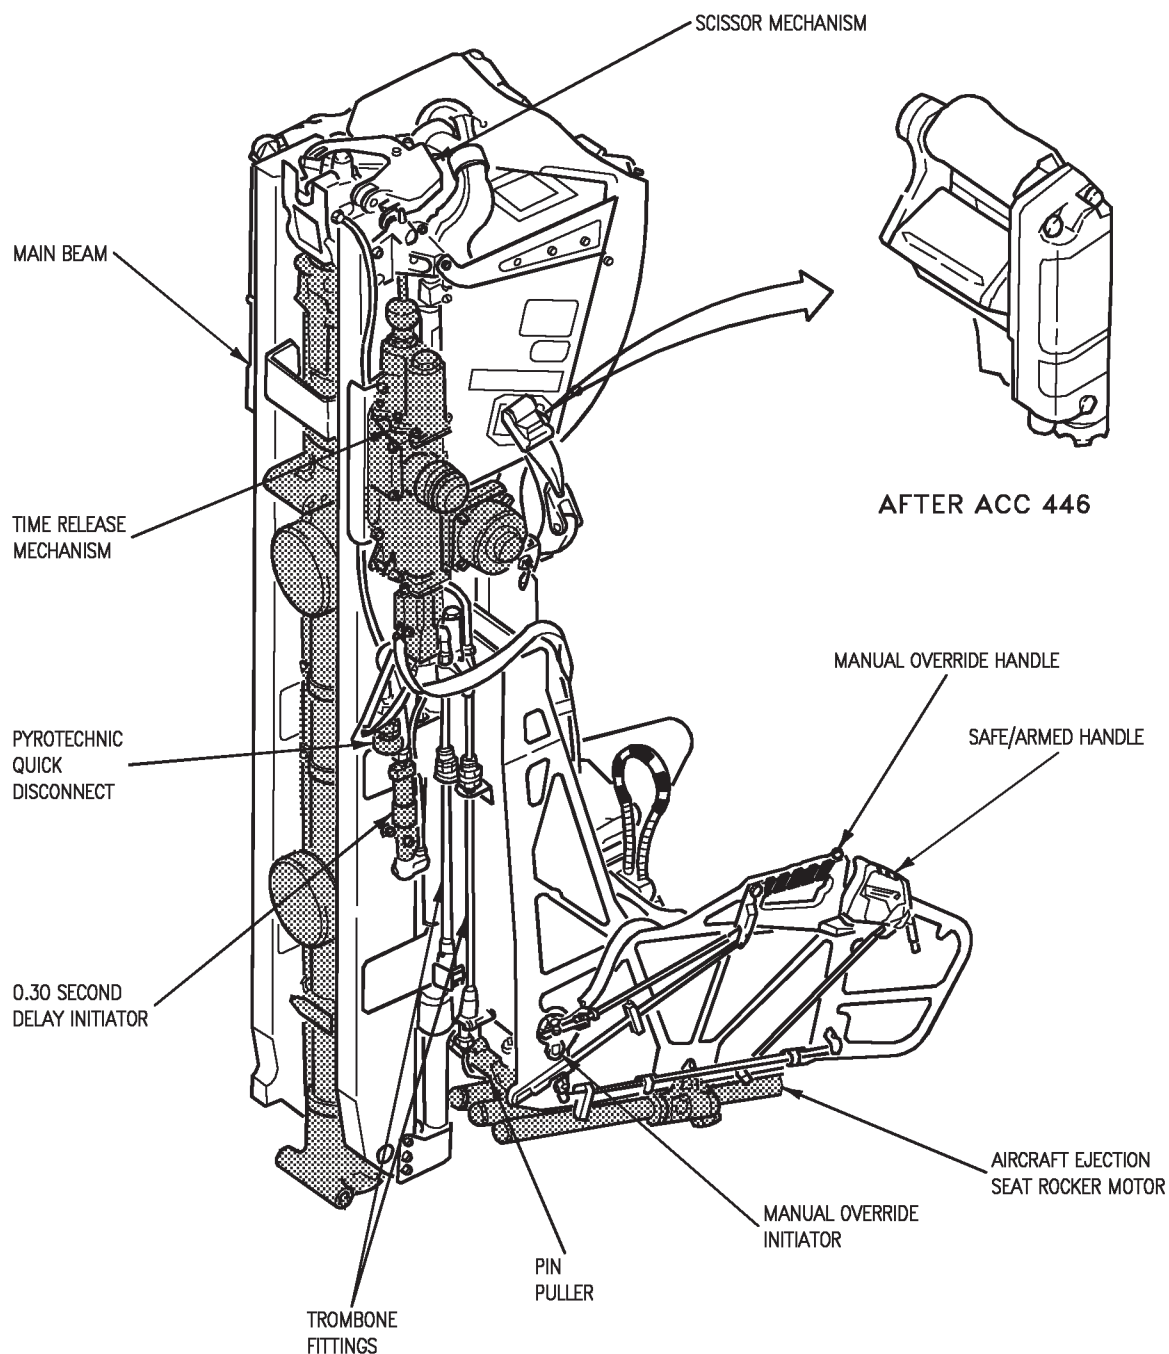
Canopy, Seat and DFIRS Explosive Devices (Sheet 1)
